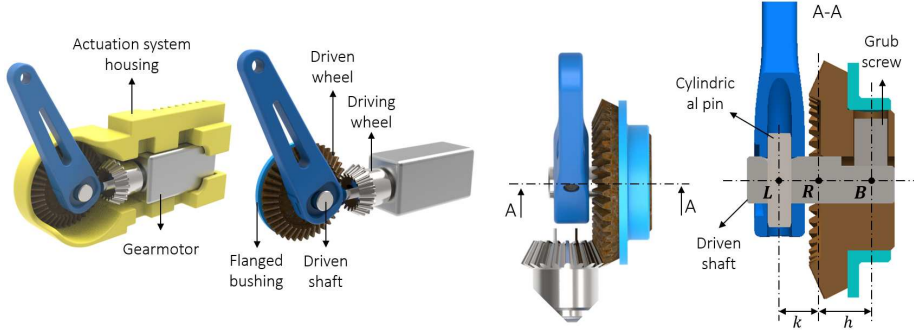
Actuation system arrangement: on the left, the actuation system components (gearmotor and gear transmission) placed in a housing designed for the purpose, and the flanged bushing to reduce friction among the parts; on the right, a sectional view of the driven shaft in which L , R , and B represent points where forces due to the interaction with the finger mechanism, driven wheel, and support, respectively, are considered applied.
